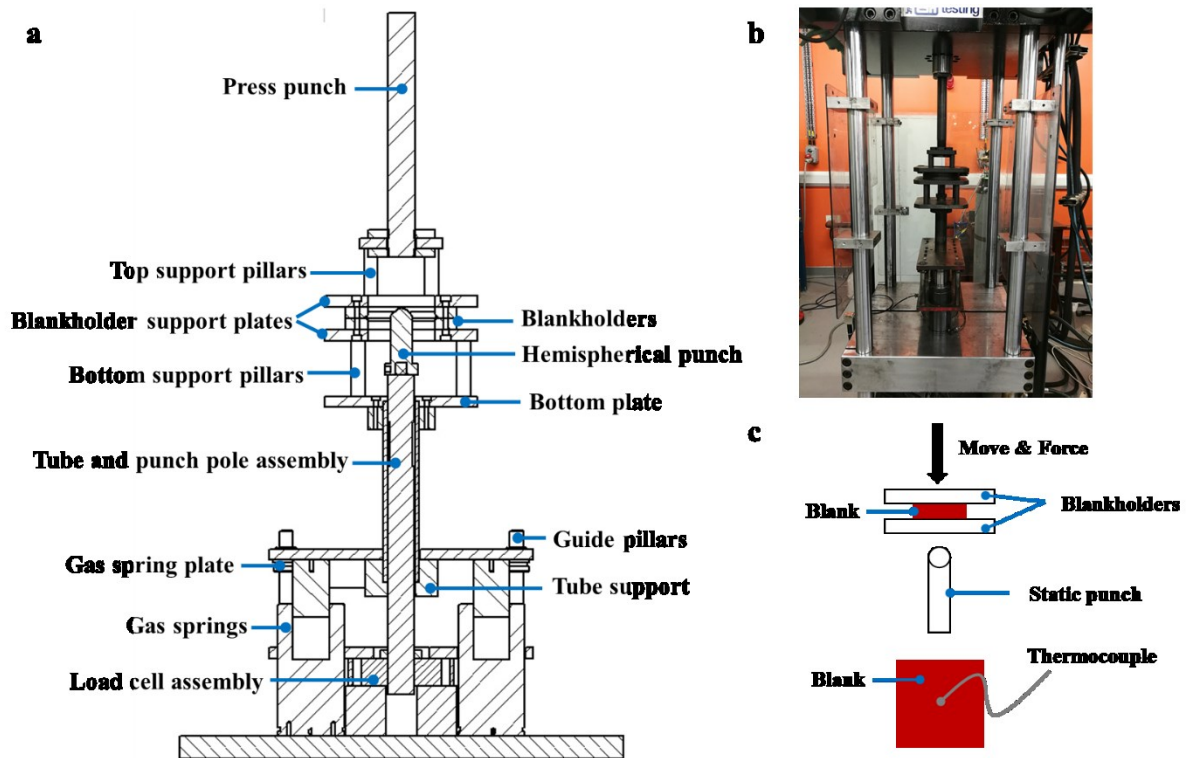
(a) Section view of the forming tools; (b) Tool assembly in the 25-tonne ESH press; (c) Schematic diagram of the press movement and the location of the thermocouple on the blank.
